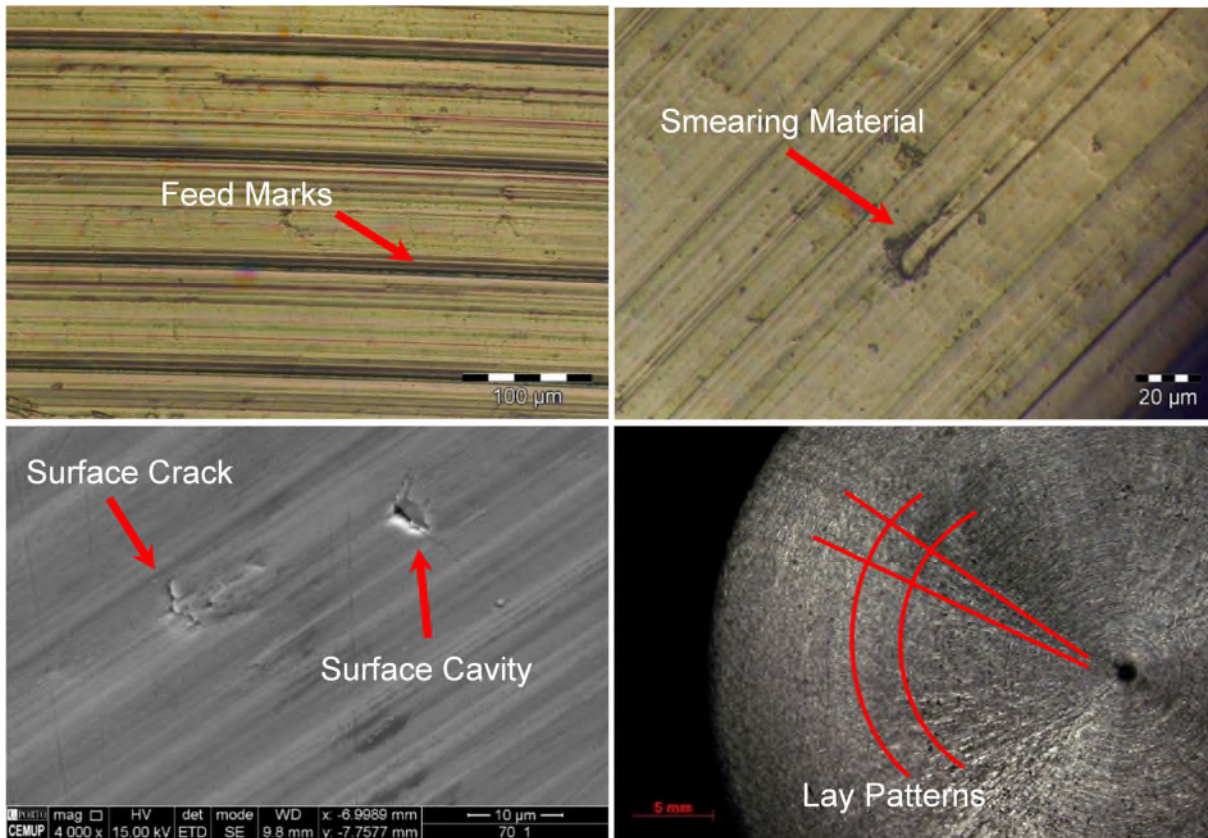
Common surface integrity defects on the titanium aluminides machined surfaces (author images).
